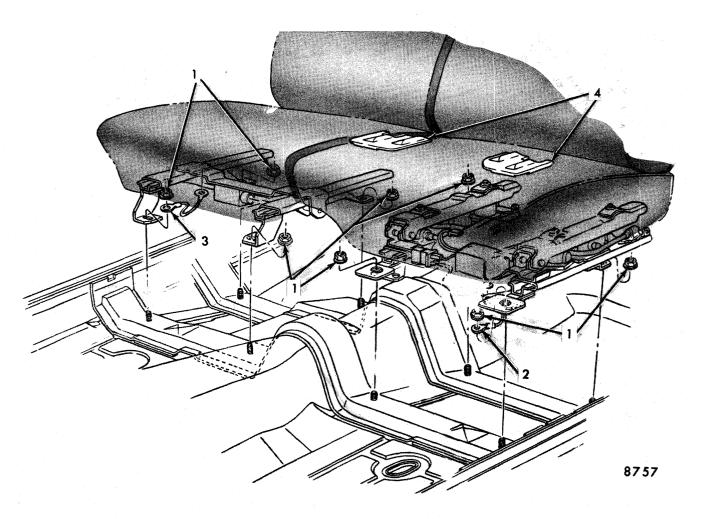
Seat Assembly (Driver's or Passenger's)
